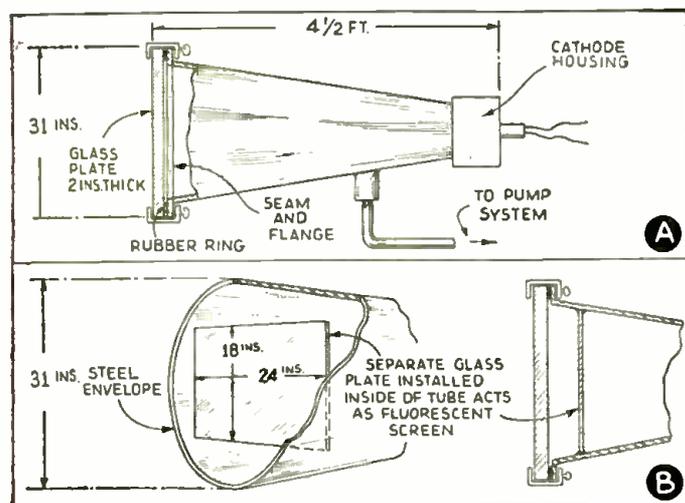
A—Glass end sealed to metal C.-R. tube body. B—End view of new distortionless-vision tube.
